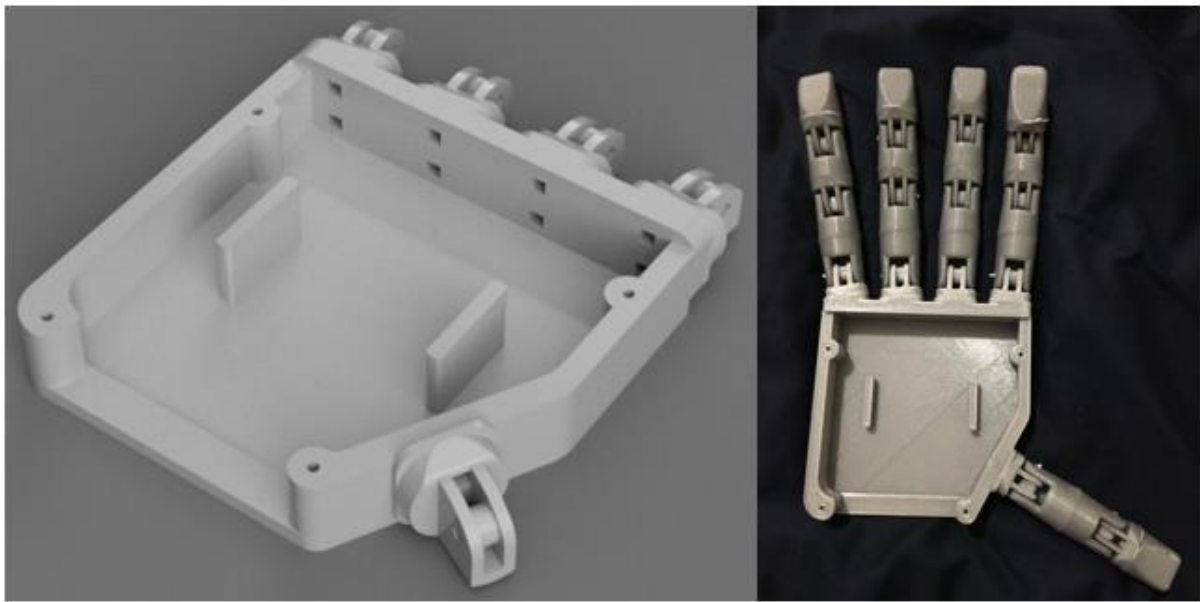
Initial Palm Design with Guides for Bowden System and Space for Camera (left). The First Printed and Assembled Hand (right).
